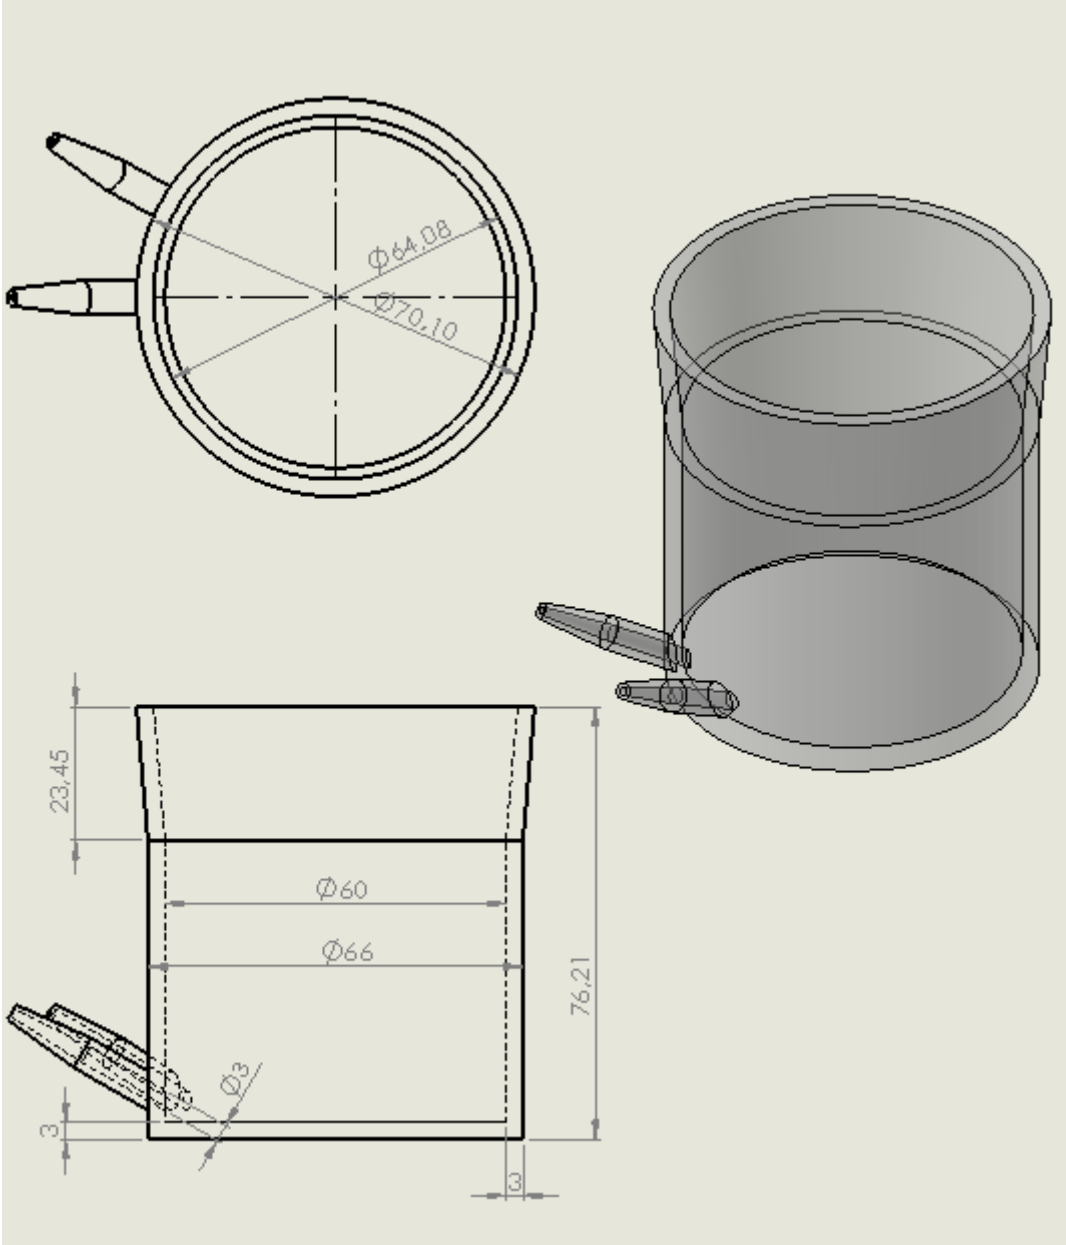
Drawing of the "Buffer tank with lid" with dimensions.
